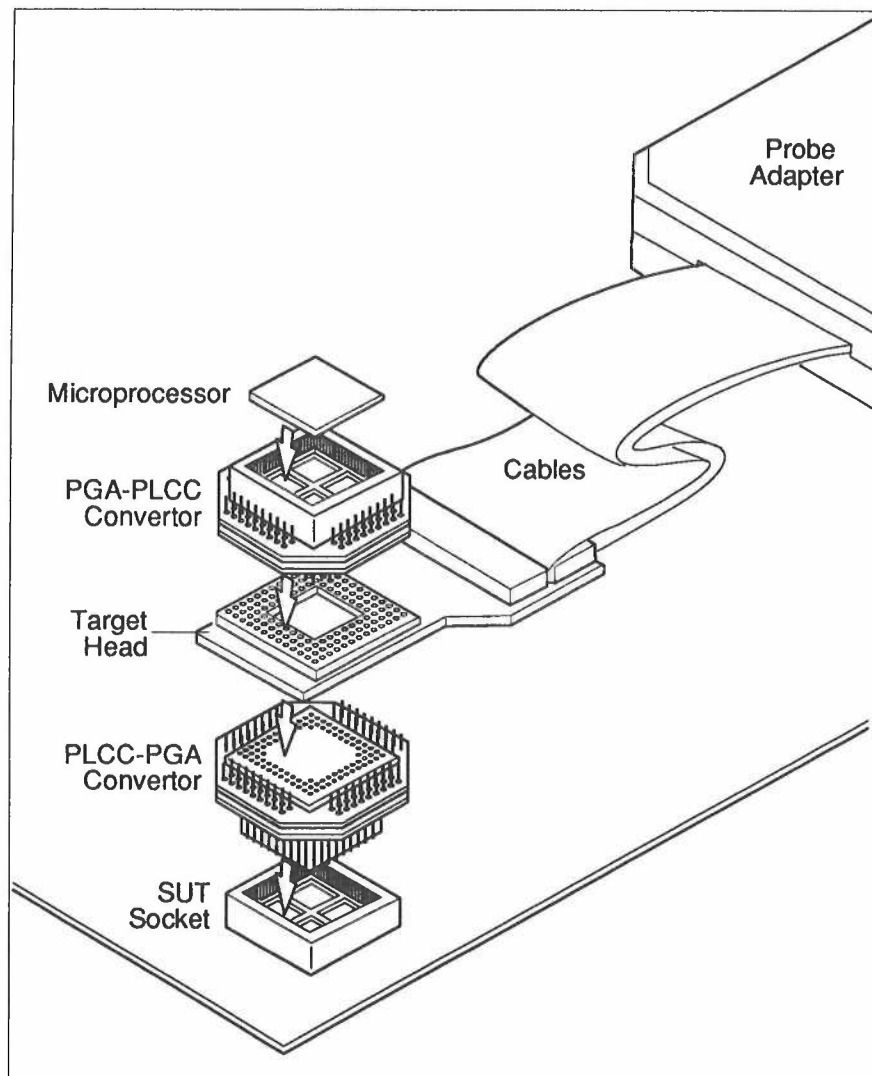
Connecting the disassembly probe adapter to a socketed PLCC.
